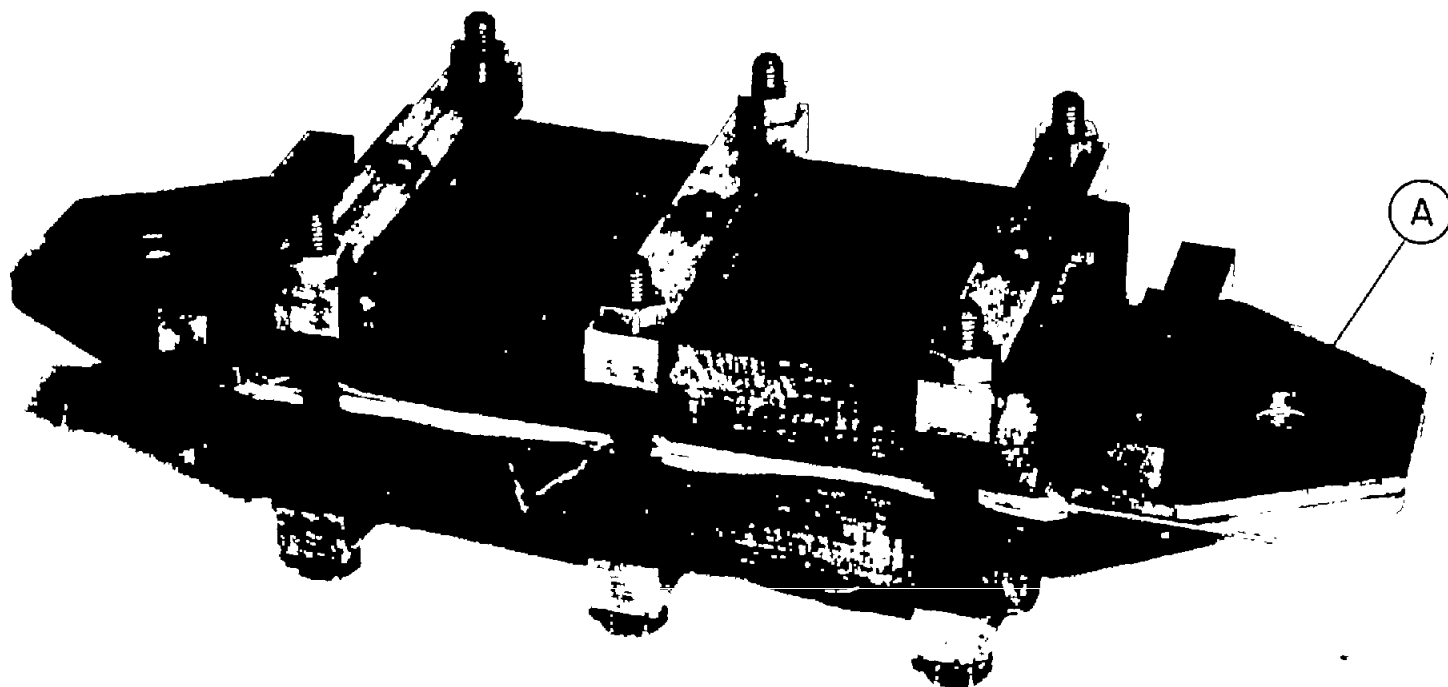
0.032-inch lap-joint fatigue specimen ready for test. A, grips.
